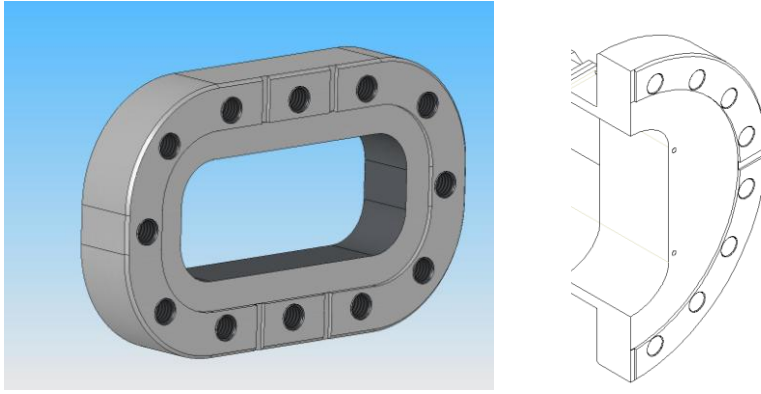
Racetrack flange (left) and circular-racetrack flange (right)
